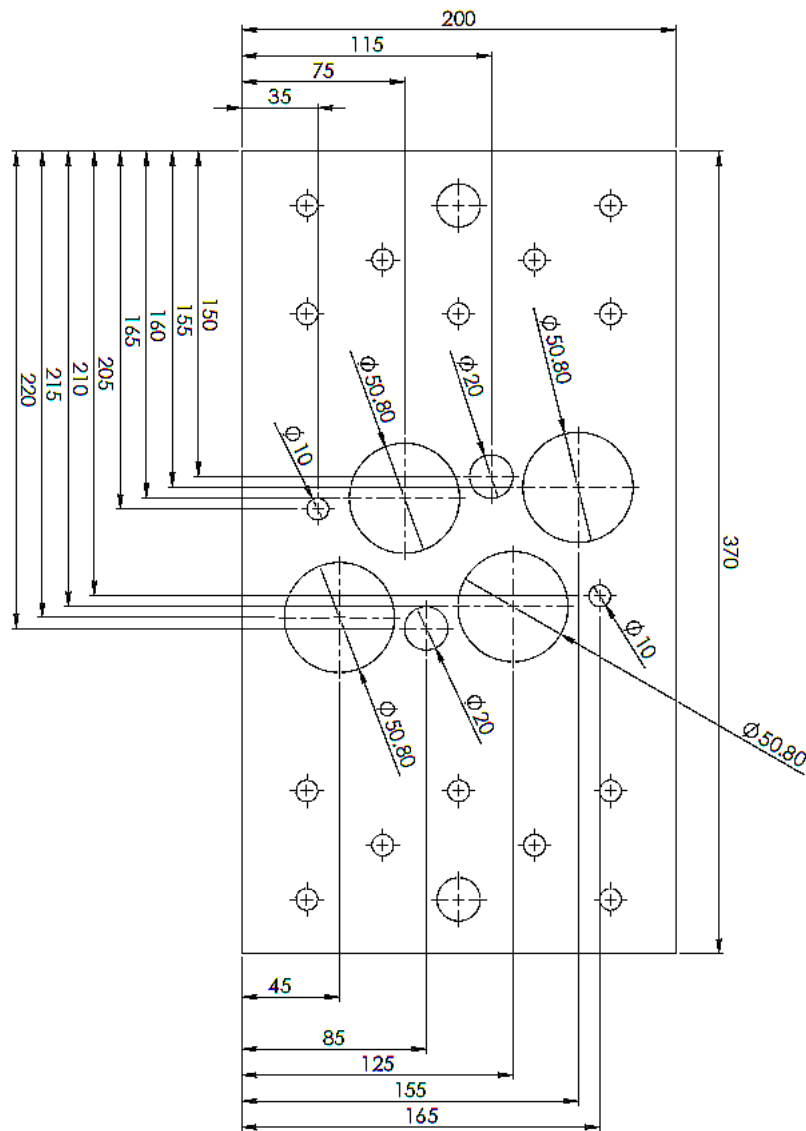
Dimensions of the complex geometry plate (all dimensions in mm)
